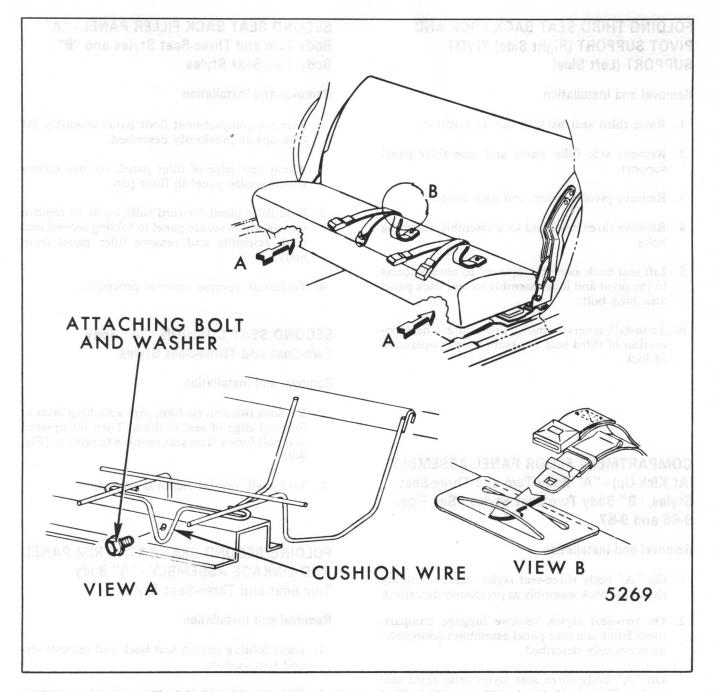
Second Seat Cushion Attachment - "A" Body Two and Three-Seat Styles
